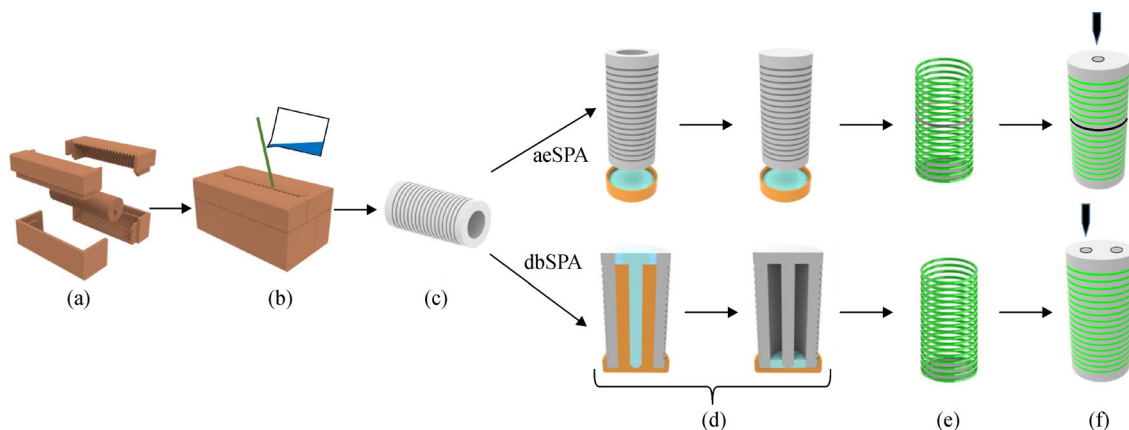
Fabrication of aeSPA and dbSPA: (a) Assembly of the mold, (b) casting, (c) de-molding, (d) sealing of the wall, (e) constraining the SPA, and (f) drilling holes for the air tube.
